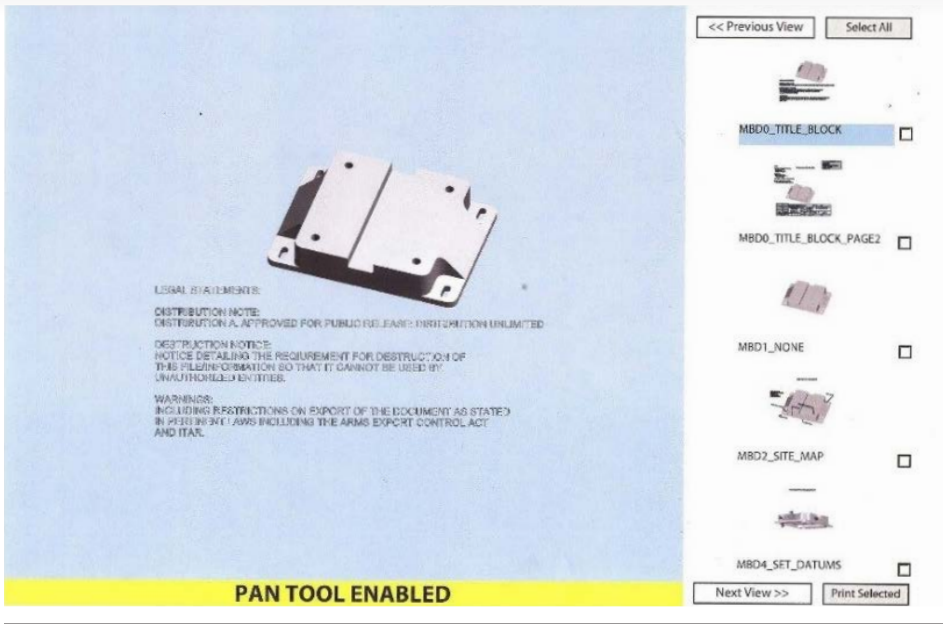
CAD Drawing of a Mock Component to Be Aluminum Cast Using 3-D Printed Sand Molds (Source: ARL).
